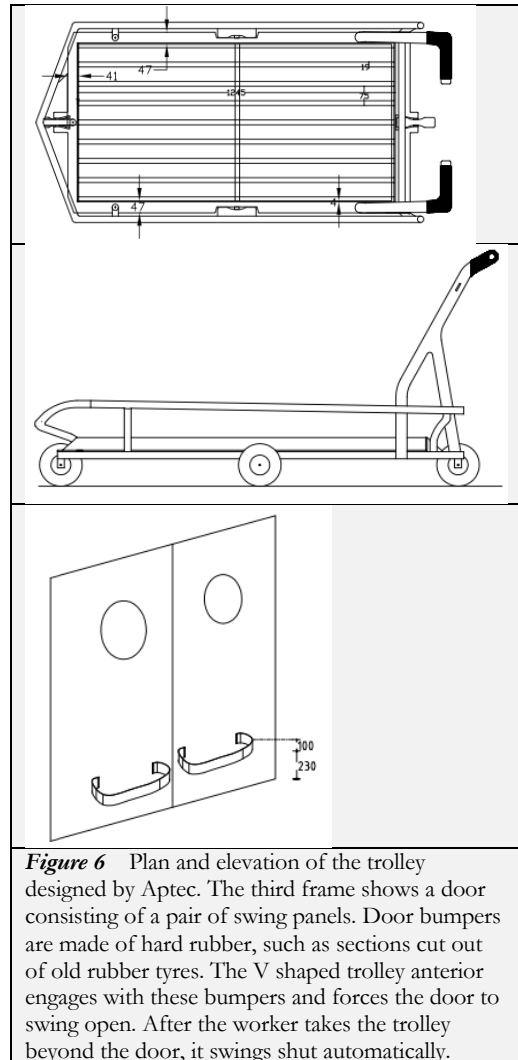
Plan and elevation of the trolley designed by Aptec. The third frame shows a door consisting of a pair of swing panels. Door bumpers are made of hard rubber, such as sections cut out of old rubber tyres. The V shaped trolley anterior engages with these bumpers and forces the door to swing open. After the worker takes the trolley beyond the door, it swings shut automatically.
